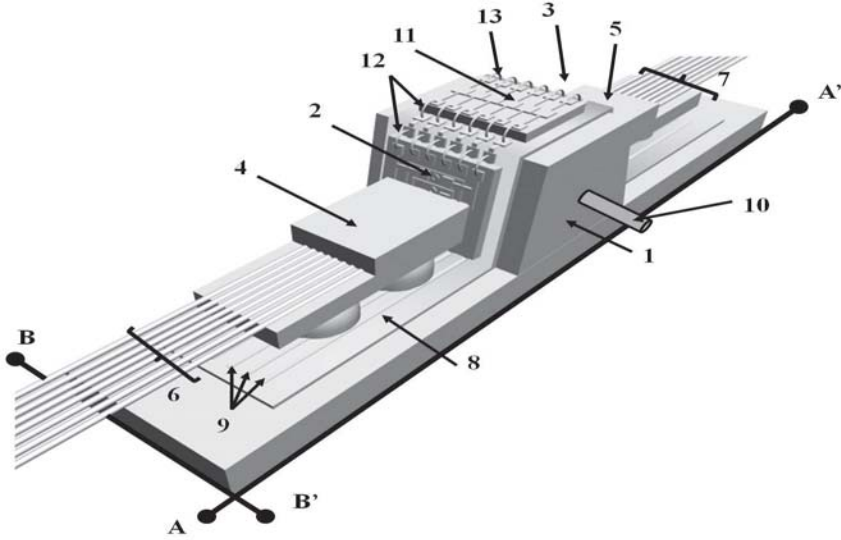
Three dimensional drawing of the generic packaging solution for multi-port grating coupler SOI devices.
